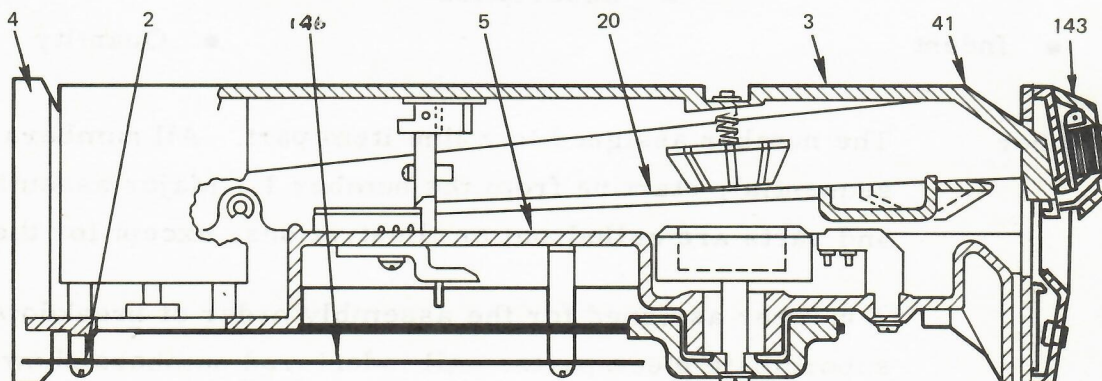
GSI-110 Flexible Disk Drive, Cutaway Side View
